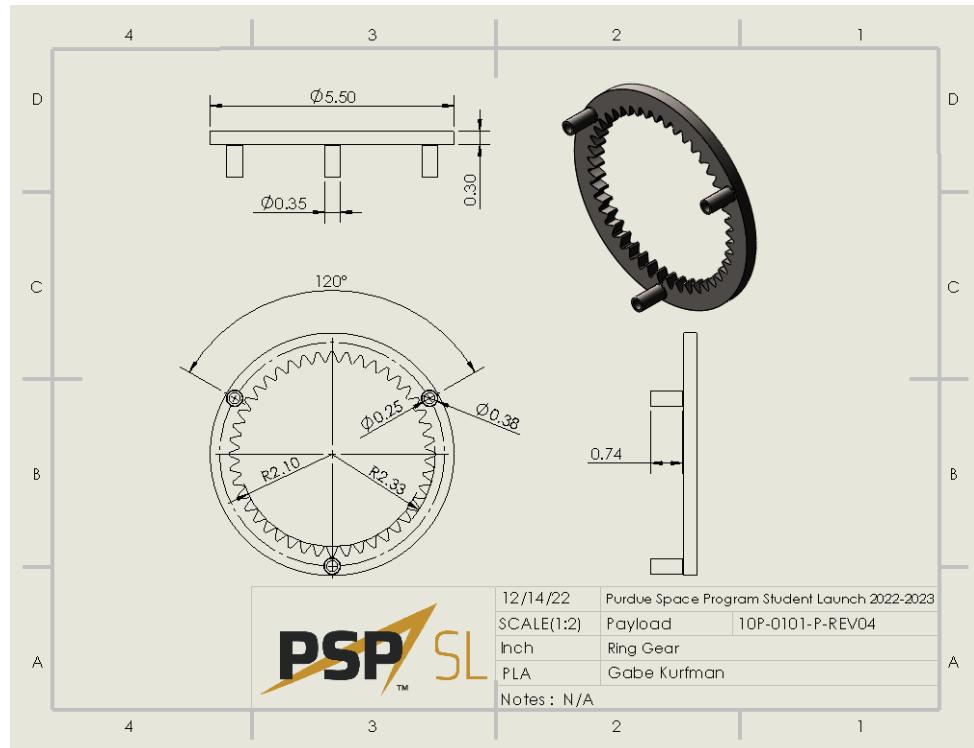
IOS Ring Gear Technical Drawing
